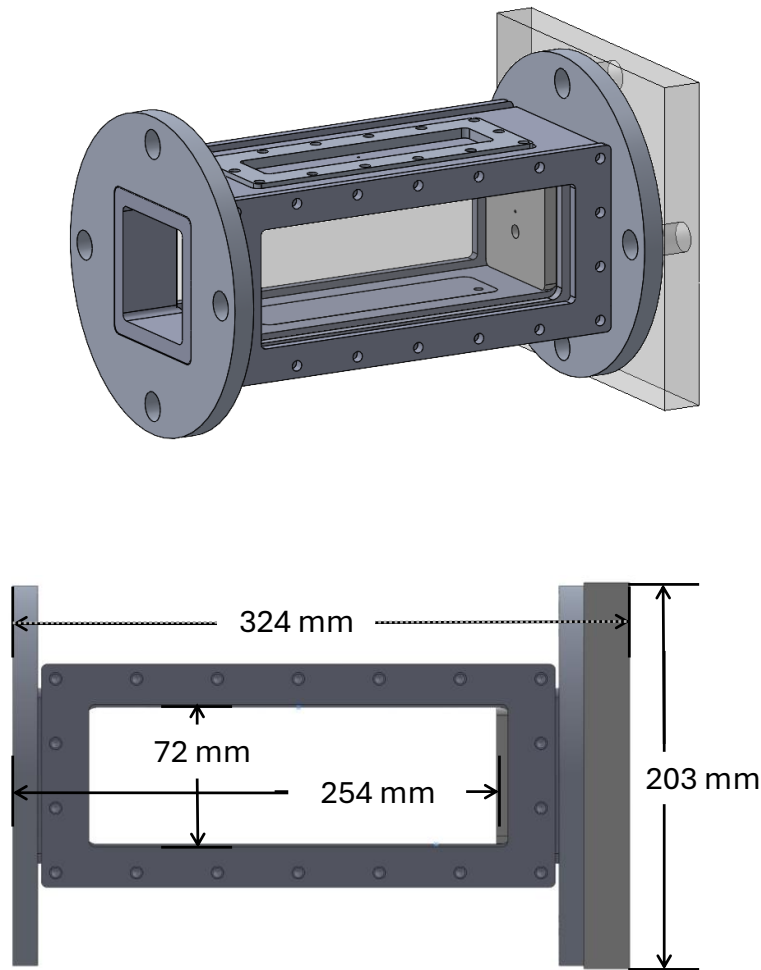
CAD model of the final iteration of the test section assembly used in shock tube experiments. Top: isometric view. Bottom: side view.
